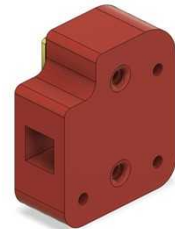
Motorized Side Conveyor Holder: Holes to connect with M3 Screws to the DC Motor Holder
